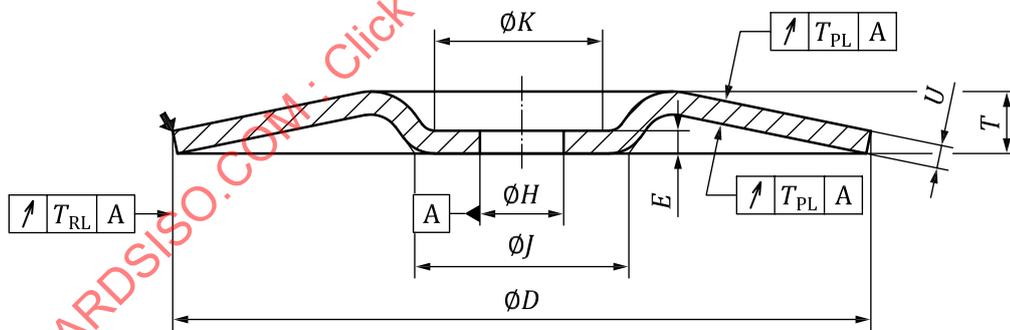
Depressed centre grinding wheel, convex shaped (Type 29)
